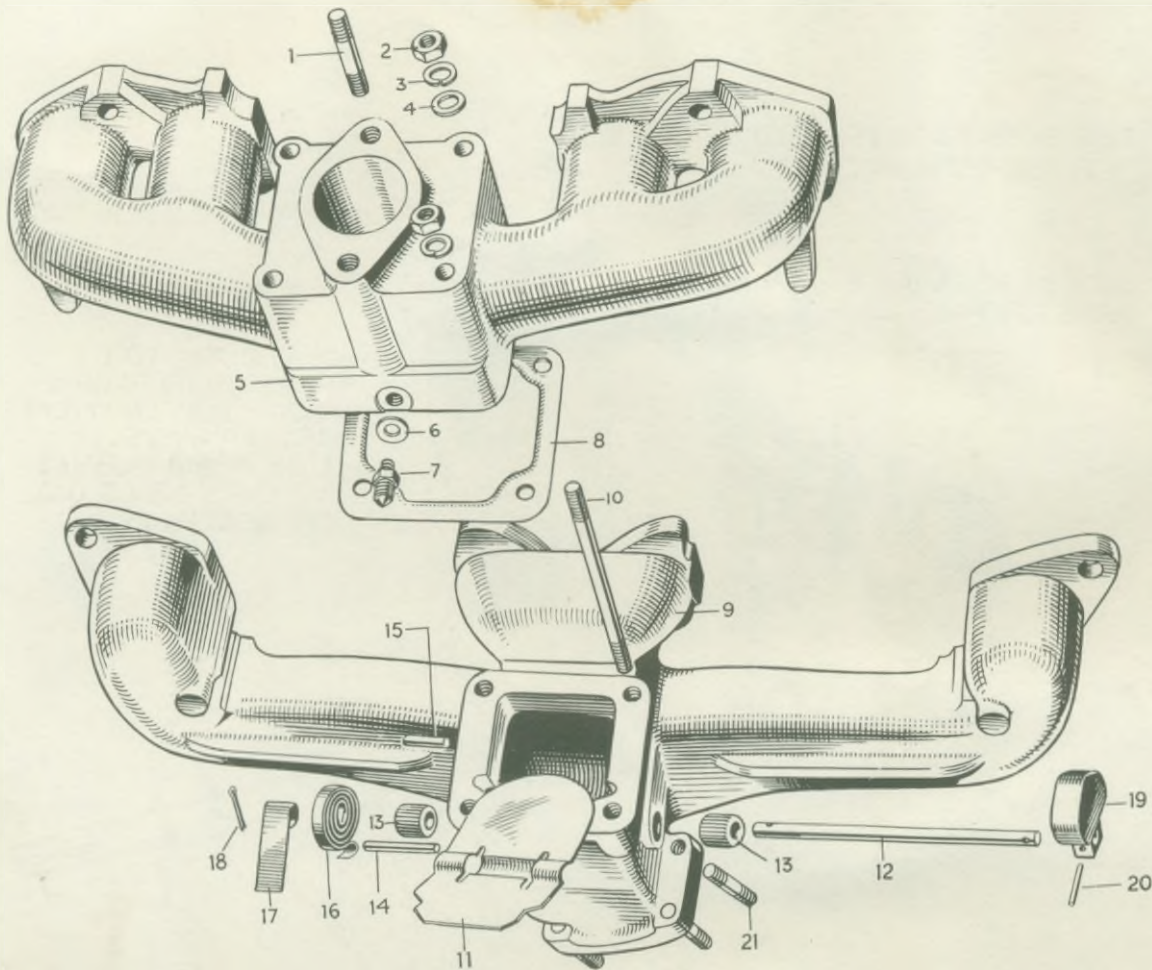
Exhaust and inlet manifold system fitted on Commission No. V134917 and future (Engine No. V135001E and future).
